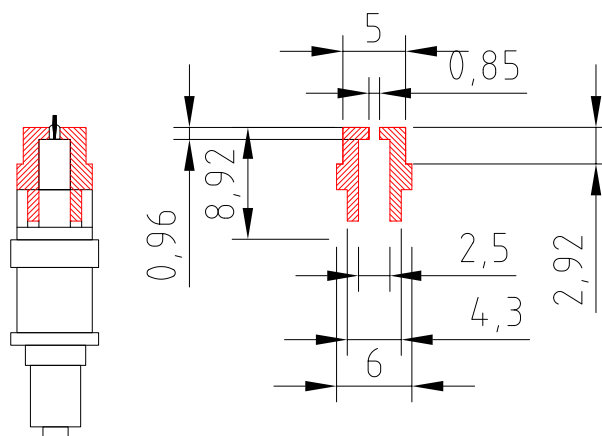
Left: FC-Connector (black) assembled with centering part (red) and microlens. Right: Dimensions of the centering part in millimeters.
